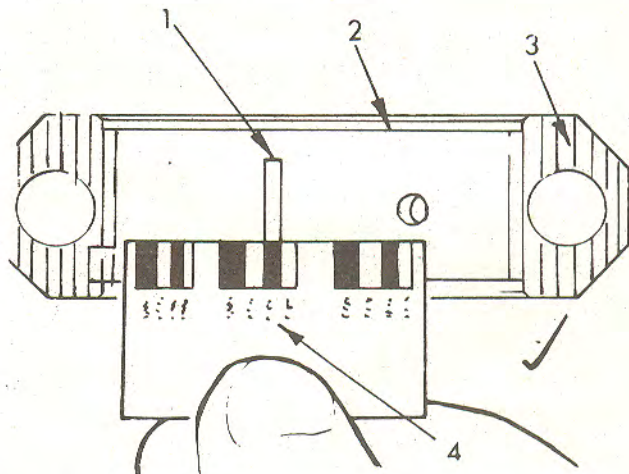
After the bearing cap has been removed, measure the width of the "Plastigage" strip by means of the scale provided in the repair kit.
